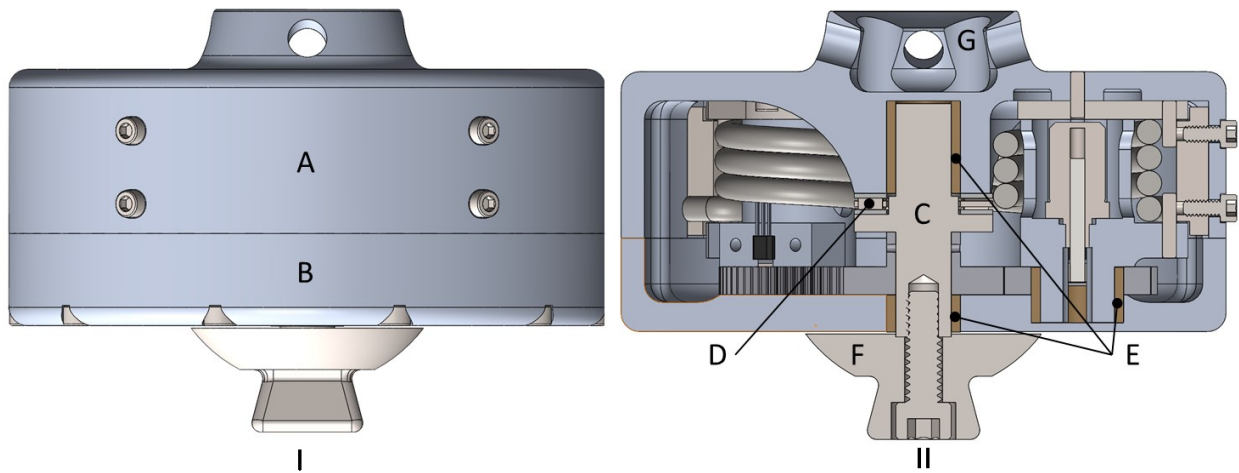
VSTA II I) Exterior, II) Cross-Section; A) Upper Housing, B) Lower Housing, C) Center Shaft, D) Main Thrust Bearing, E) Support Bushings, E) Male Pyramid Adapter, F) Female Pyramid Adapter
